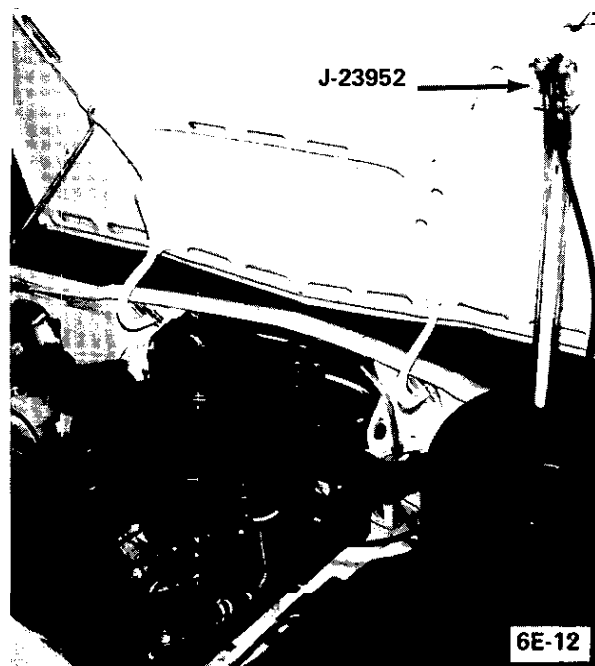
E-12 Throttle Plate Calibrator J-23951 Installed
